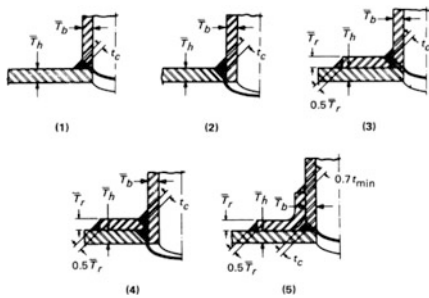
Branch welds in piping. (Source: ASME B31.3, Fig. 328.5.4D)
